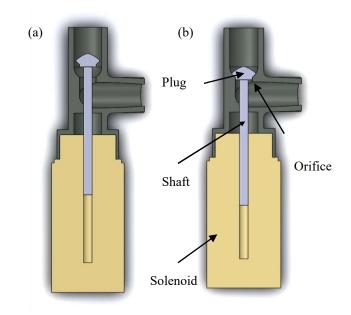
(a) Valve Open. (b) Valve Closed. ^[2]
